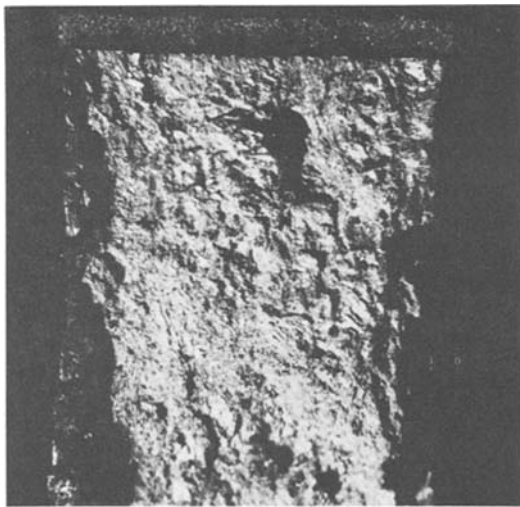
Fracture surface of a bend specimen showing shear lips of approximately 1 mm deep. (X5.4).
